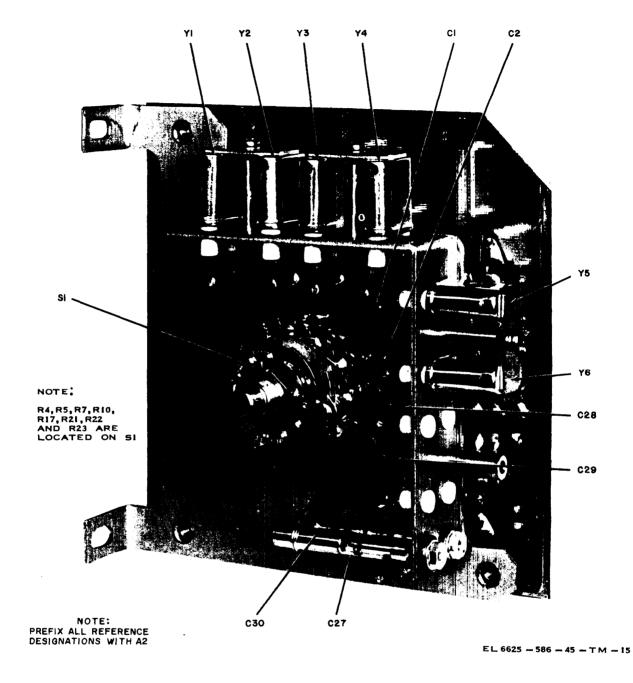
IF assembly A2, bottom view, cover and board A2A1 removed.
